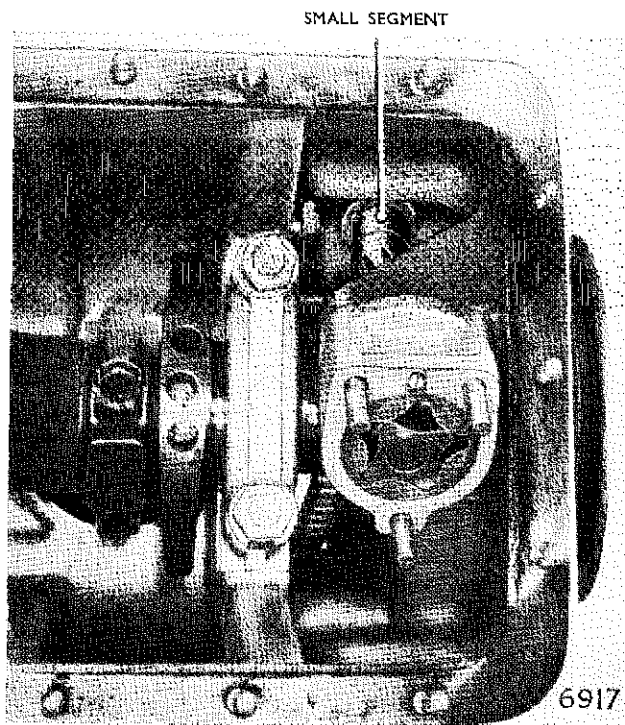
Oil pump with bottom cover and filter removed—position of pump drive at No. 1 TDC fixing
